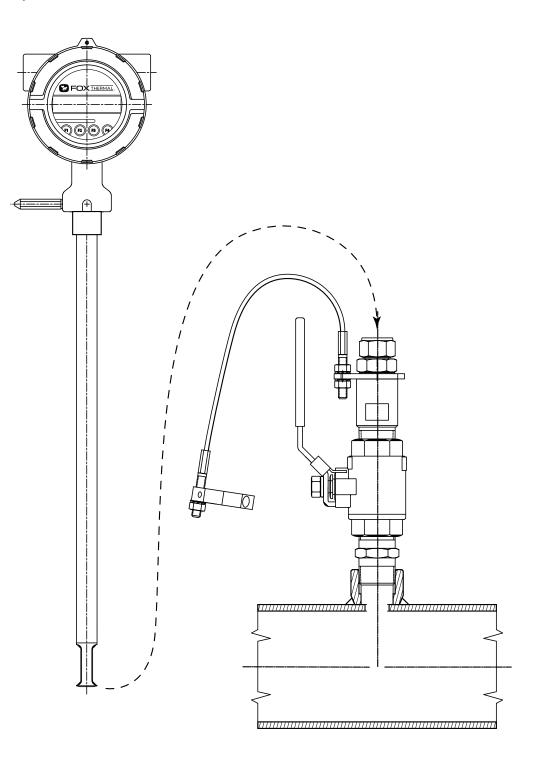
Retractor Assembly With and Without Probe Installed
